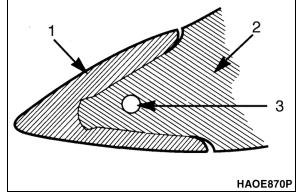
1. POINT, 2. ADAPTER & 3. PIN
